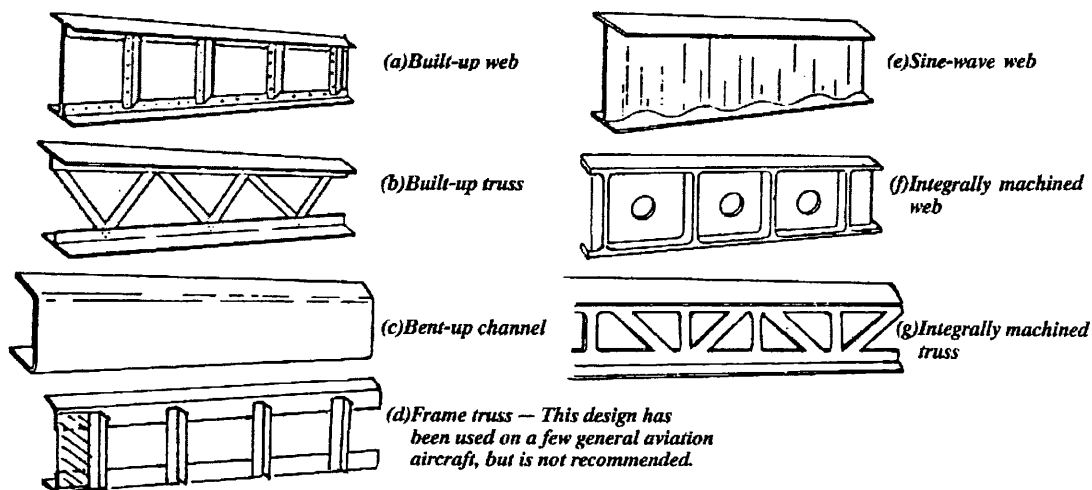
Schematic of Typical Metallic Spar Configurations [63]
